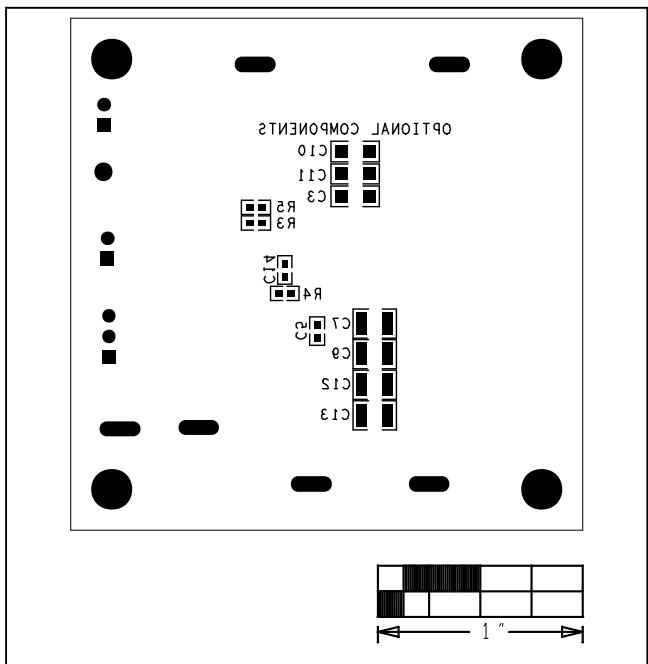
MAXM17543 EV Kit Component Placement Guide—
